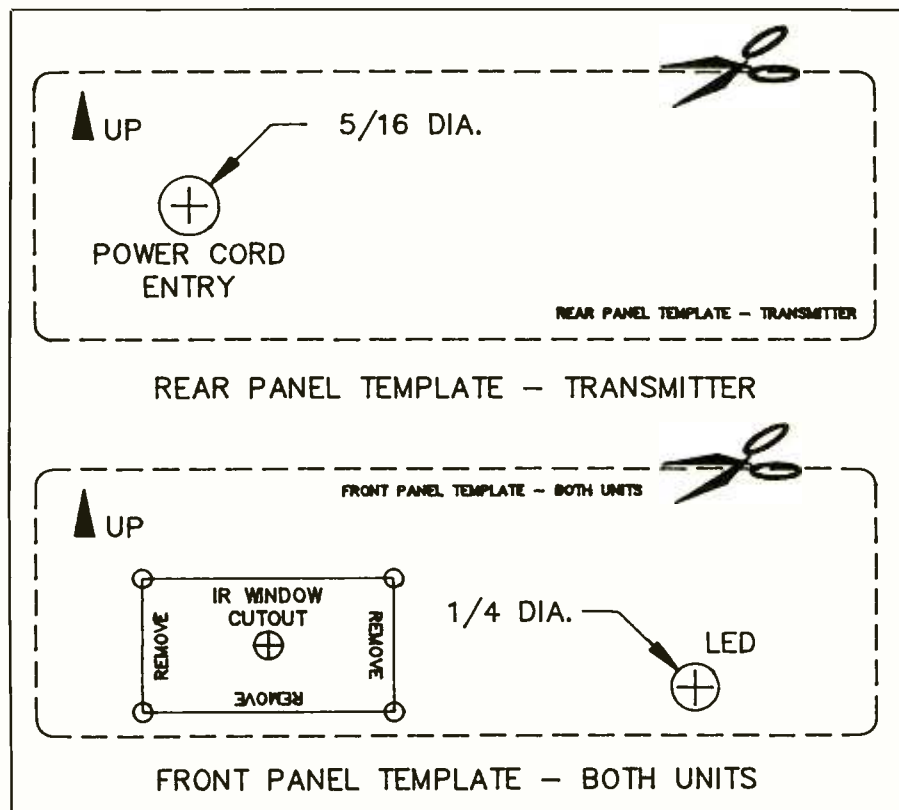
Fabrication details for front and rear panels of the enclosure.
